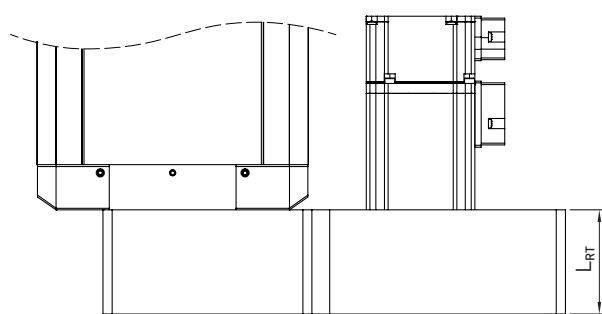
Motor connection of linear tables HT-S with belt drive
